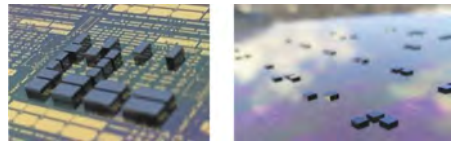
3D assembled demonstrators: (a) copper pillar assemblies; (b) direct hybrid bonding assemblies.
